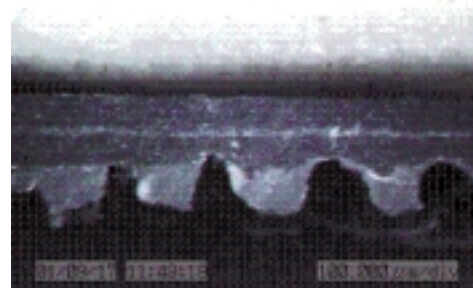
Cutting Surface of Welded Parts by Saw-toothed Sonotrode
